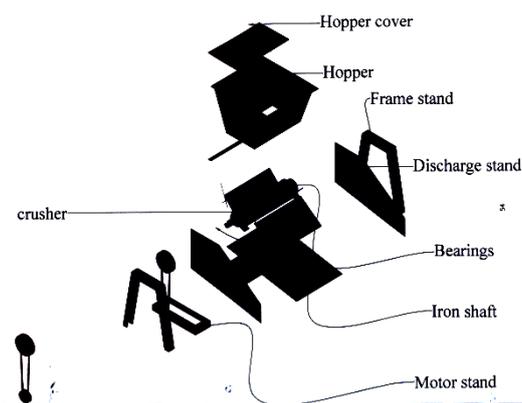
Parts Description of Exploded view of Akpu (Cassava) Milling Machine
